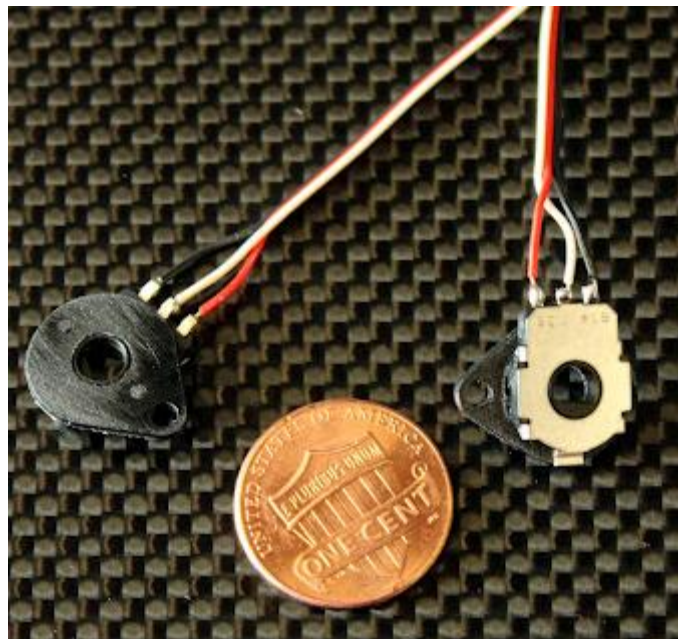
Potentiometer Glued to Delrin Potentiometer Mount with Soldered Wires
